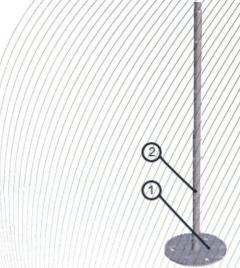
Anchors, type: ES 300-800 III B / B-S / HD-B
